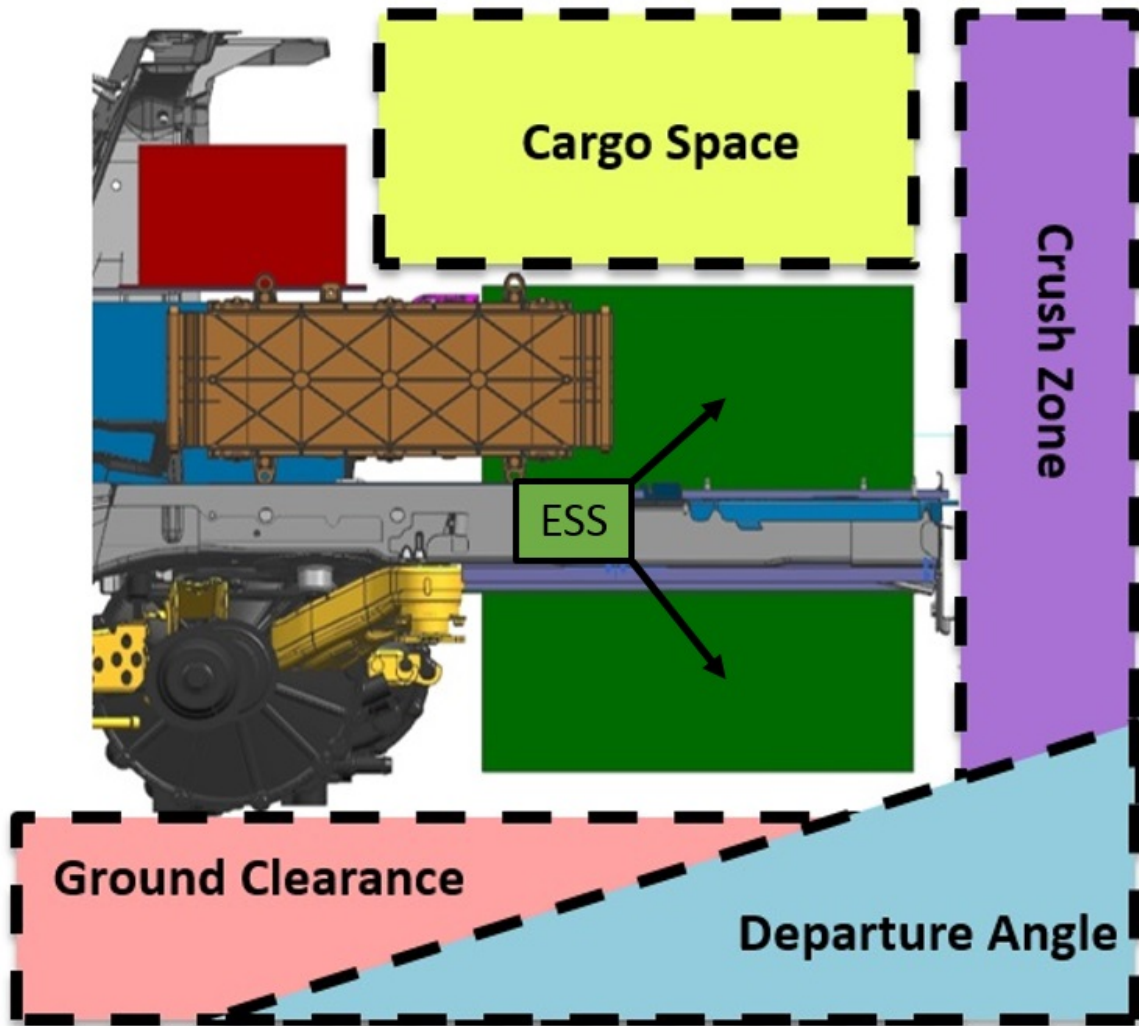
Required buffer zones for ESS placement - Rear Side view of vehicle.
